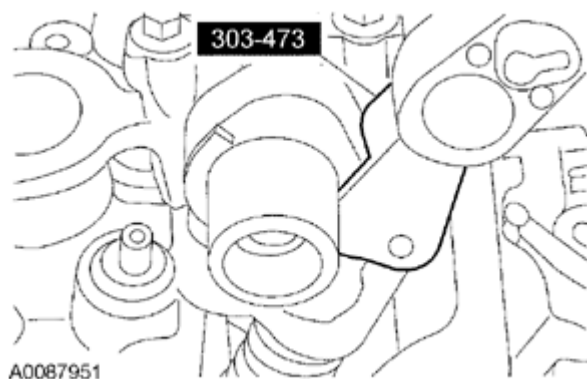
Remove/Install Key, Retainer And Valve Spring Using Valve Spring Compressor
